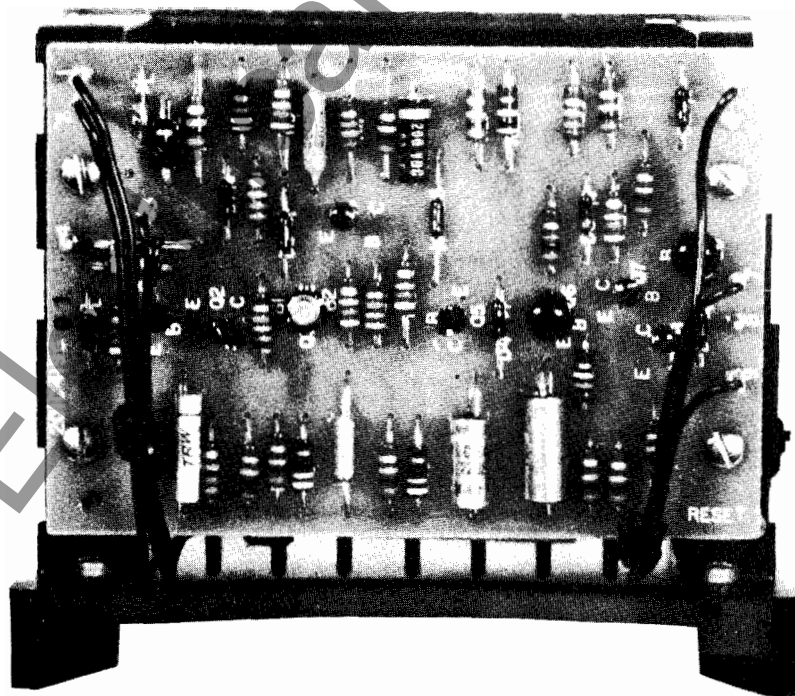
Type SGR-51 Reclosing Relay (Rear View)
